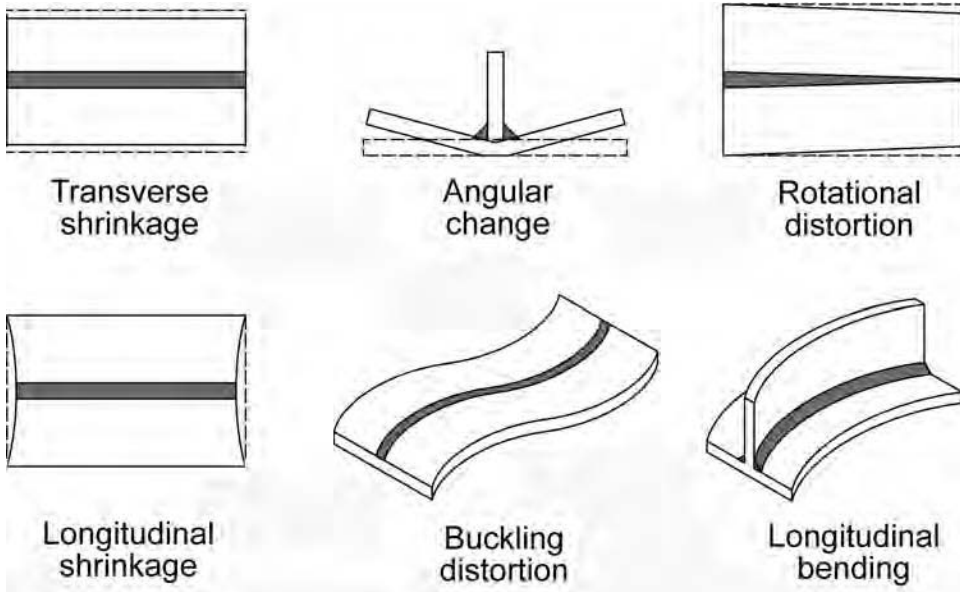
Types of welding distortion. Source: Ref 62
